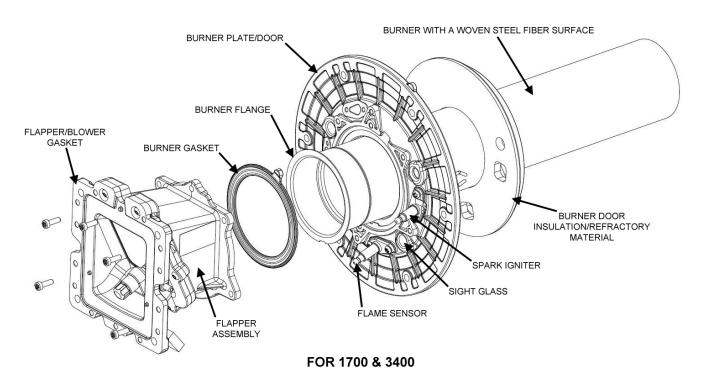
BURNER ASSEMBLY (1700/3400)
